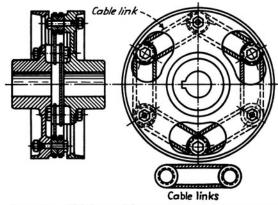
This Bruce-Macbeth Engine Company coupling is similar to that of Fig. 276, except that six endless wire cable links are used, made of plow-steel wire rope. The links engage small metal spools mounted on eccentric bushings. By turning these bushings, the links are adjusted to the proper tension. The load is transmitted from one flange to the other by direct pull on the cable links.
